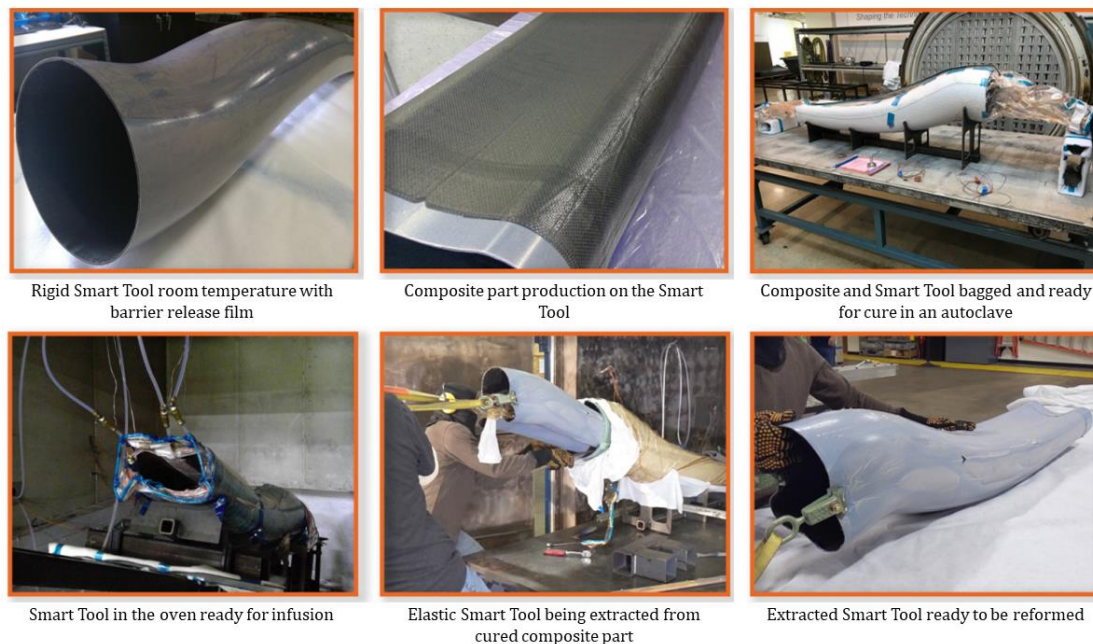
UAV inlet duct production with Smart Tooling, adapted from [60].
